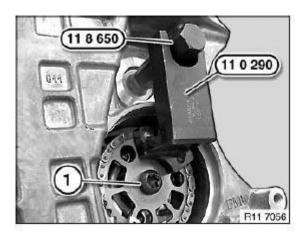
Identifying Special Tool (11 0 290) In Sprocket Wheel Courtesy of BMW OF NORTH AMERICA, INC.
